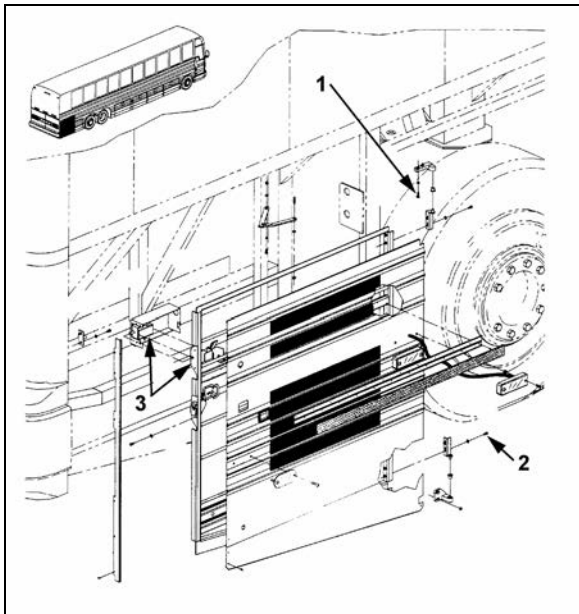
ENGINE COMPARTMENT R. H. SIDE DOOR
